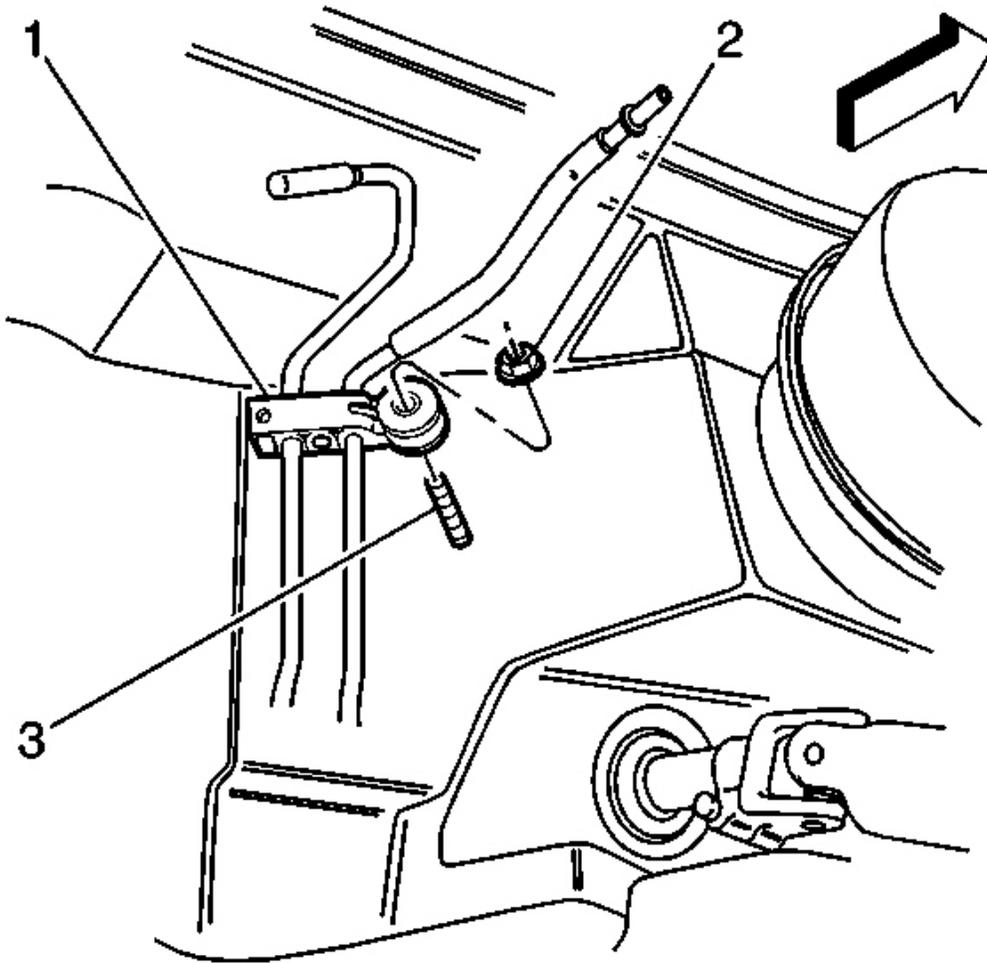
Chassis Fuel Pipe, Fuel Feed Hose & Fuel Rail
